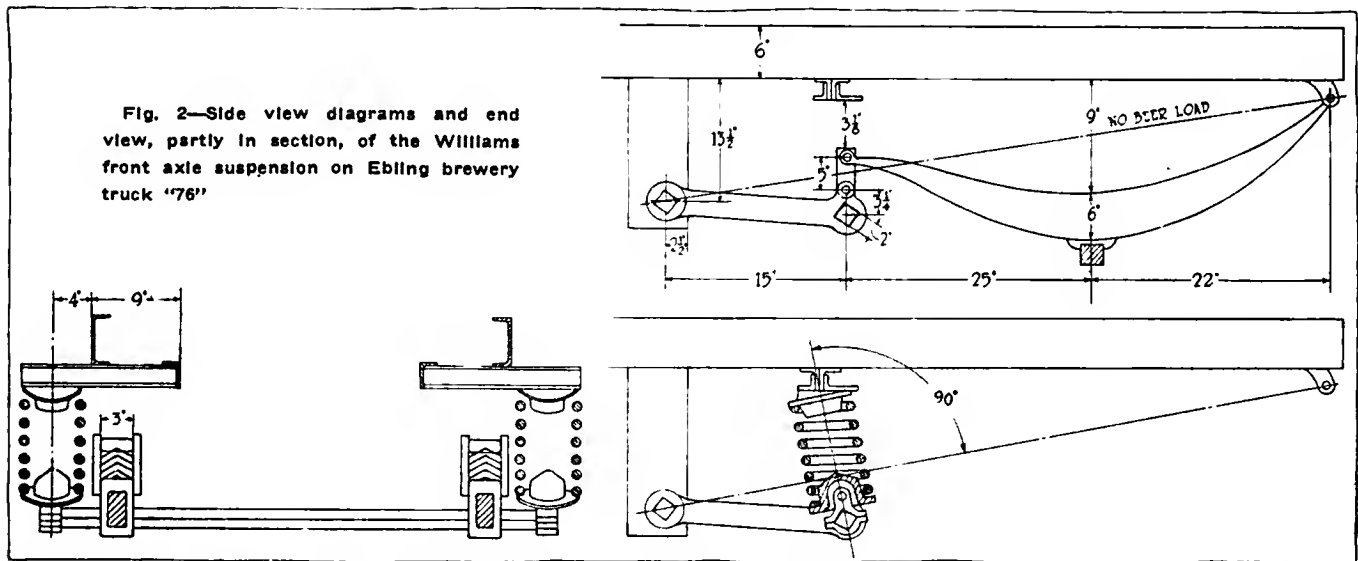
Side view diagrams and end view, partly in section, of the Williams front axle suspension on Ebling brewery truck '76'
